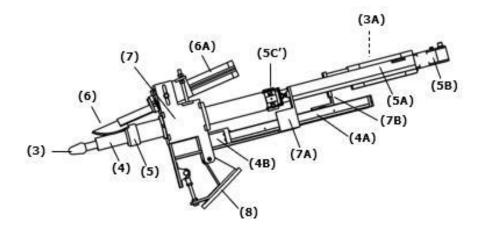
Technical drawing and design of fully automated bung cutter with actuators
